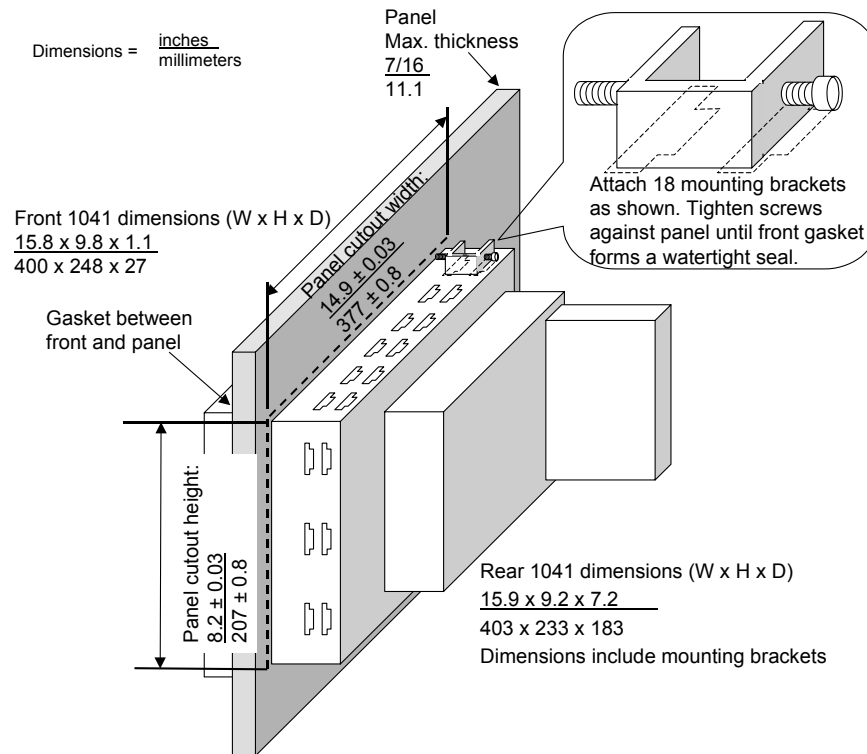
Operator Interface Panel Mounting Dimensions, Model 1042
